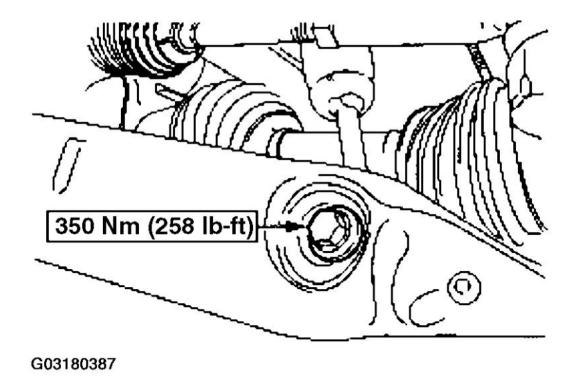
Removing Bolt And Flag Nut Courtesy of FORD MOTOR CO.
